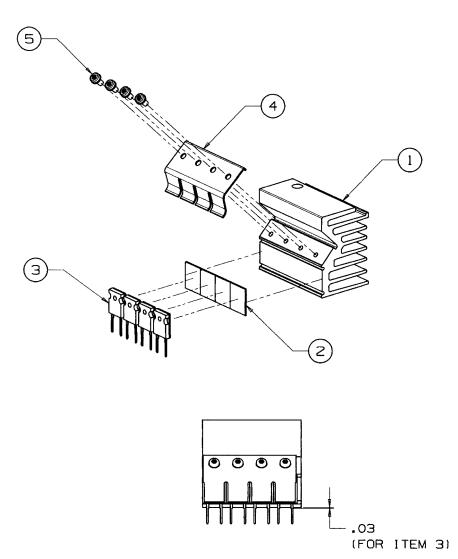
CE4000 PS Diode Heatsink Assembly (Exploded View)
